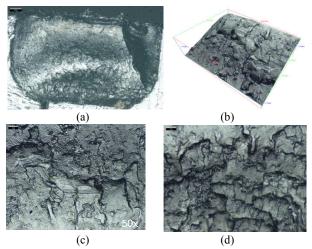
inspection of instantaneous fracture on lock unit (a) Crack overview (b) 3D surface scanning (c) Smooth fracture surface (d)
